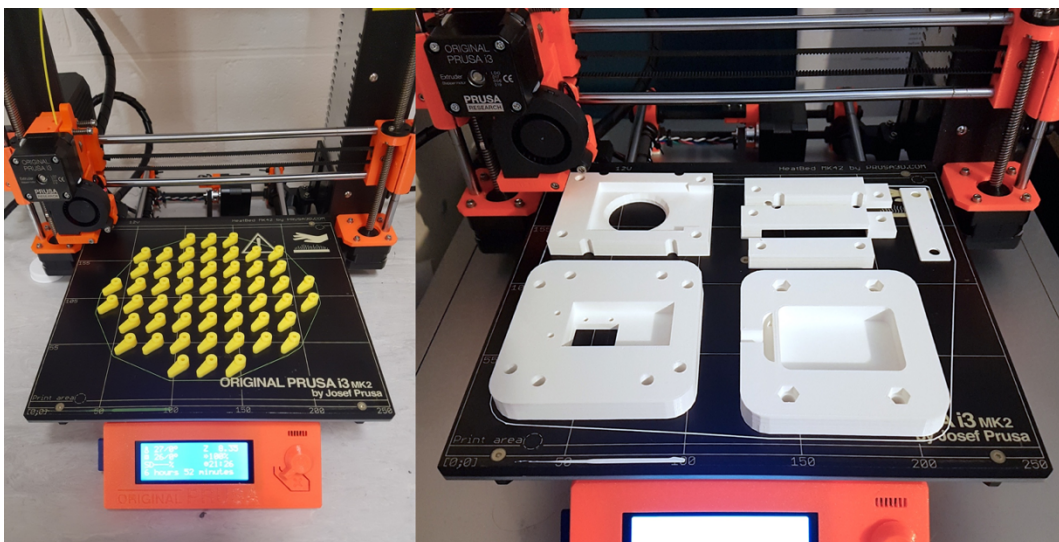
3D parts for the CaviCam printed on the Prusa i3 MK2S consumer 3D printer. *Left panel* A bulk number of prints of a single part illustrating the capacity of 3D printing for high-volume fabrication. *Right panel* All parts for a single CaviCam device (version 2) printed at the same time. The parts were printed overnight and took approximately 13 hours.
